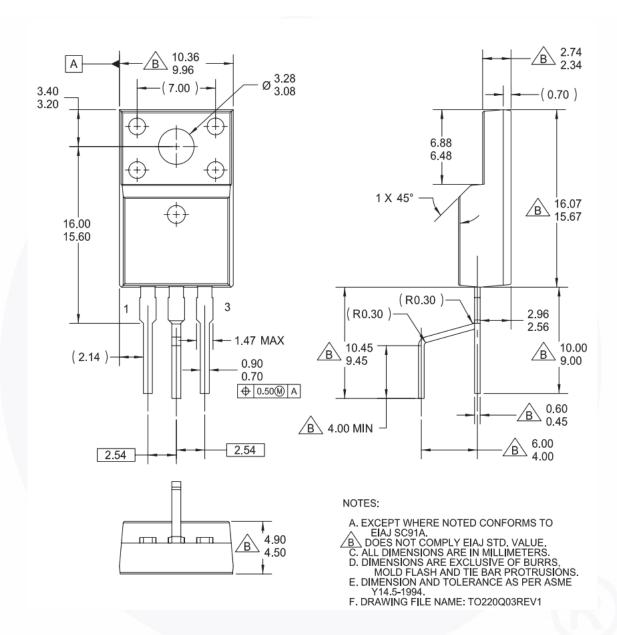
TO220, Molded, 3-Lead, Full Pack, EIAJ SC91, Y-Formed
